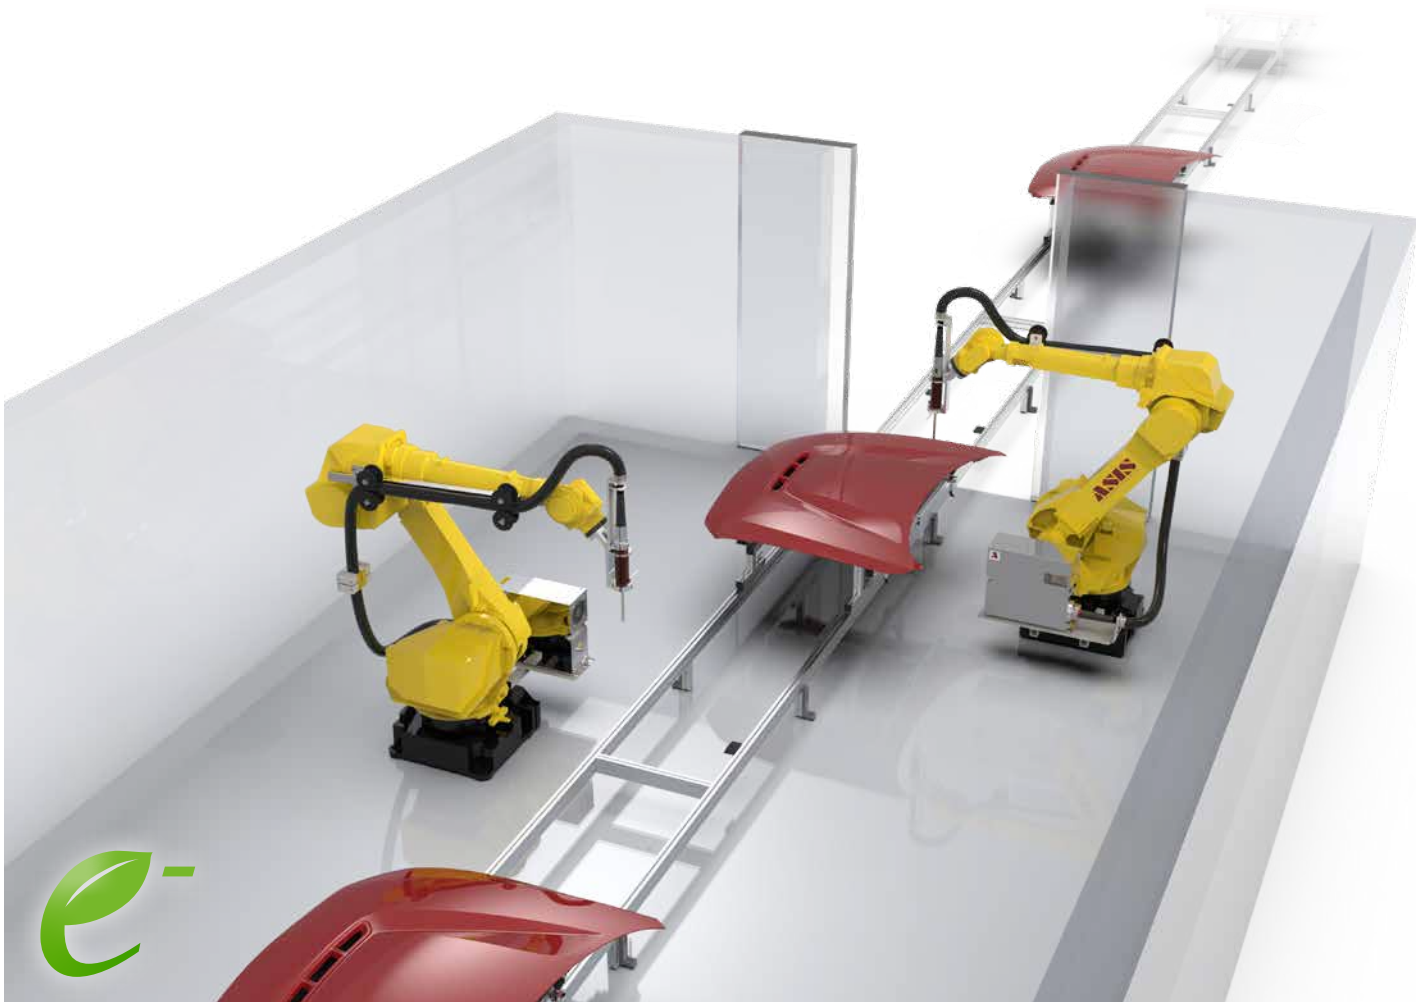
Robot-controlled EBC of three-dimensional form parts
